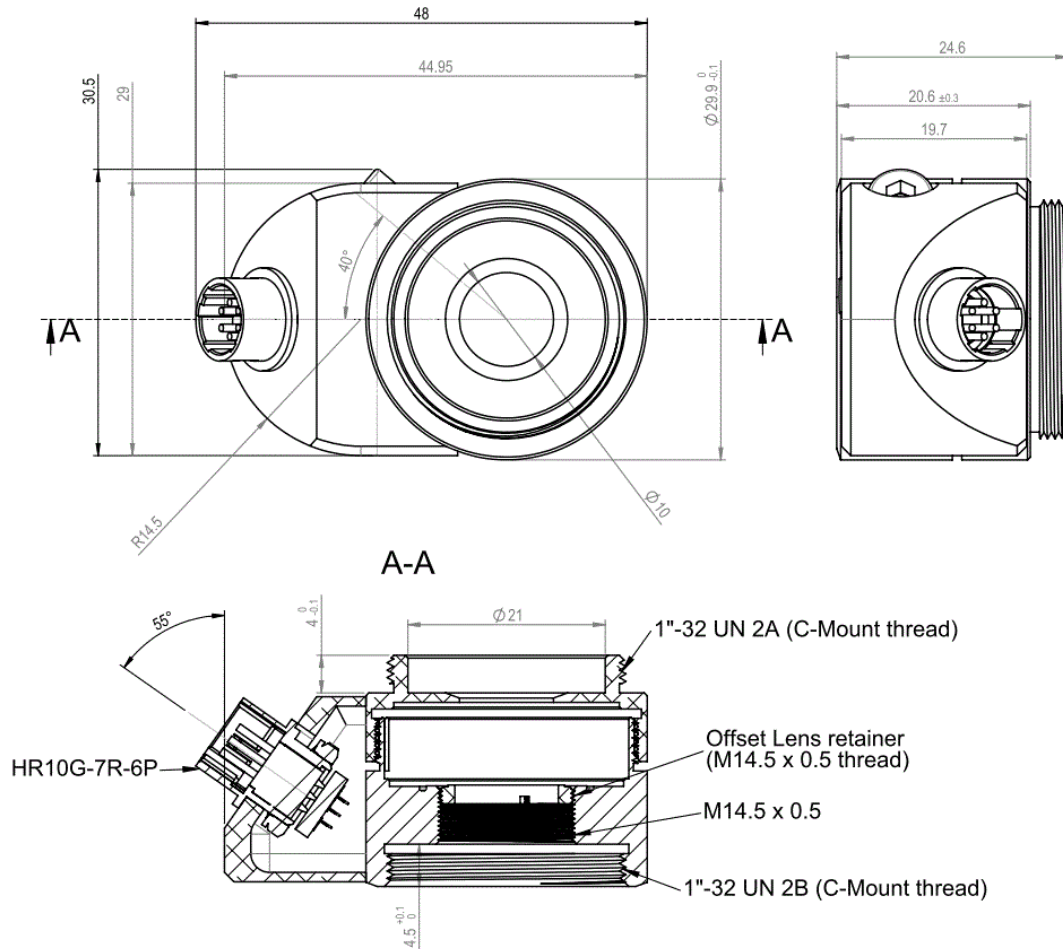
Mechanical drawing of the industrial C-mount EL-10-30-Ci (unit: mm).
